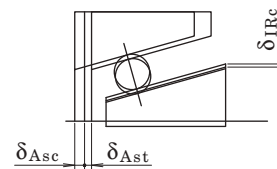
4c Change of dimension due to centrifugal expansion of inner ring raceway
